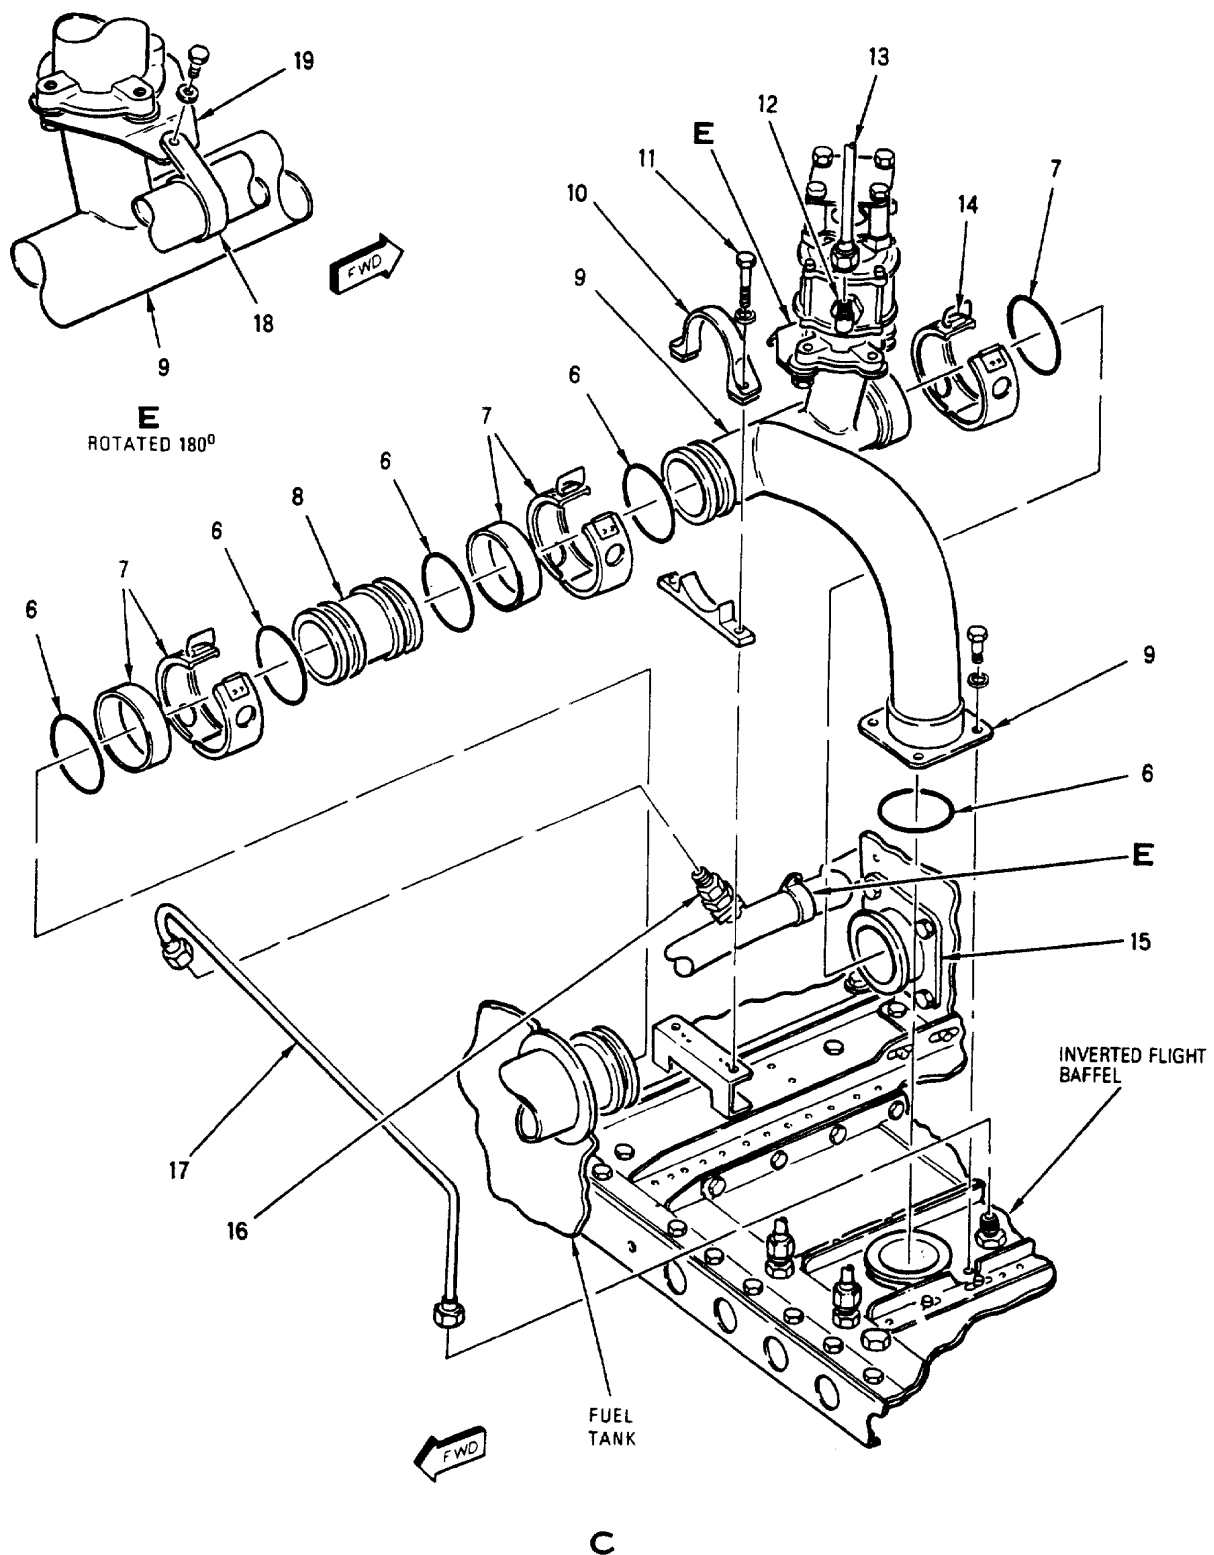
Defuel Valve (5VAP521) (Sheet 3)
